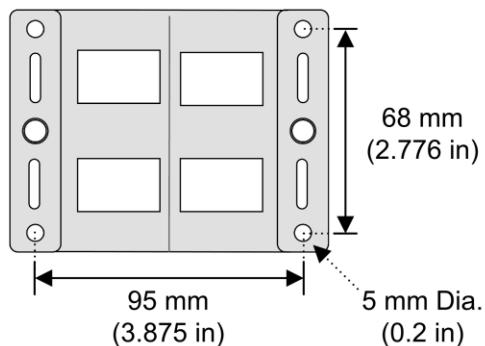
Installation: Mounting Kit - Flat-to-Wall Dimensions
